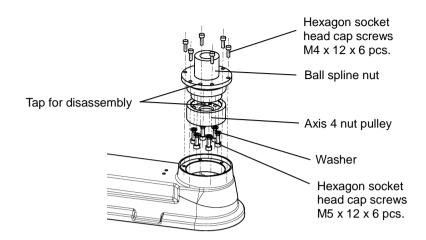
Dismounting ball screw spline nut (KHL-500, KHL-600, KHL-700)
